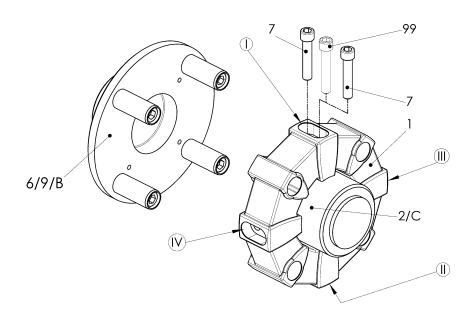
Mounting the rubber element (Type 008A-00250-.S..)
